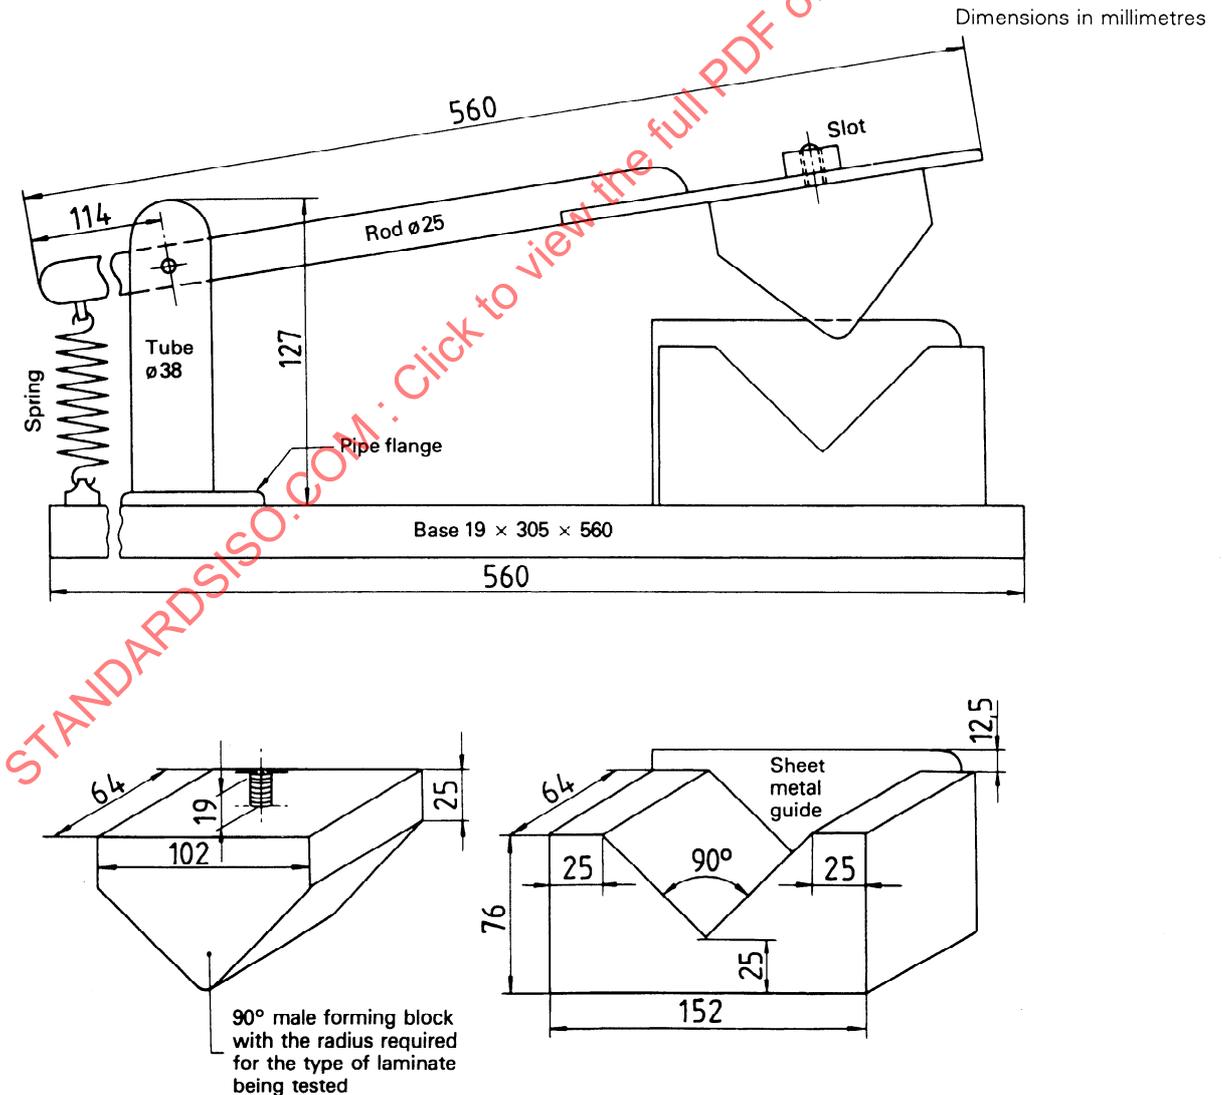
Forming apparatus (radiant heat test) (Method A) (see 19.2.5)
